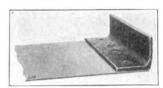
Example of Spot-Welded Joints Courtesy of Toledo Electric Welder Company
